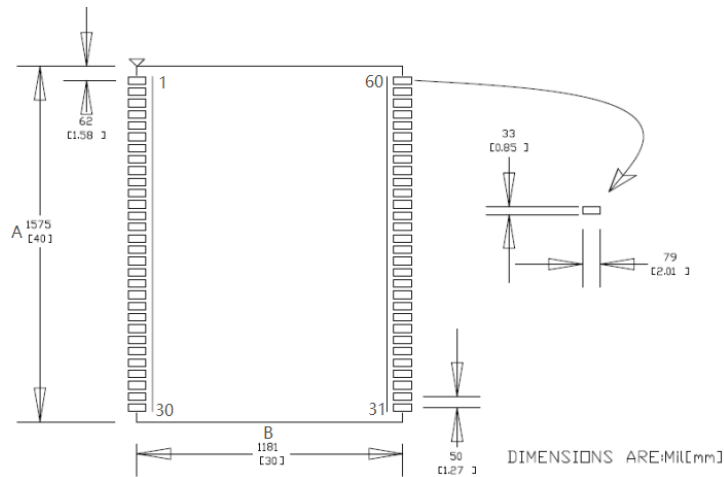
Module Package Dimensions (All dimensions in mm)
